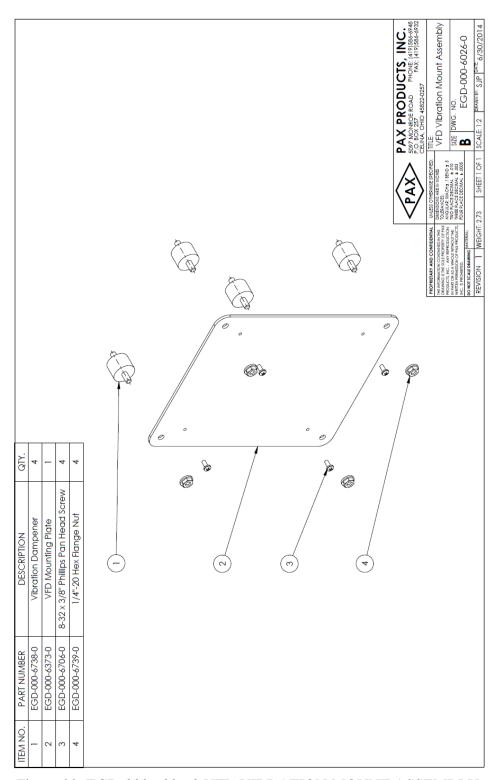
EGD-000-6026-0 VFD VIBRATION MOUNT ASSEMBLY
